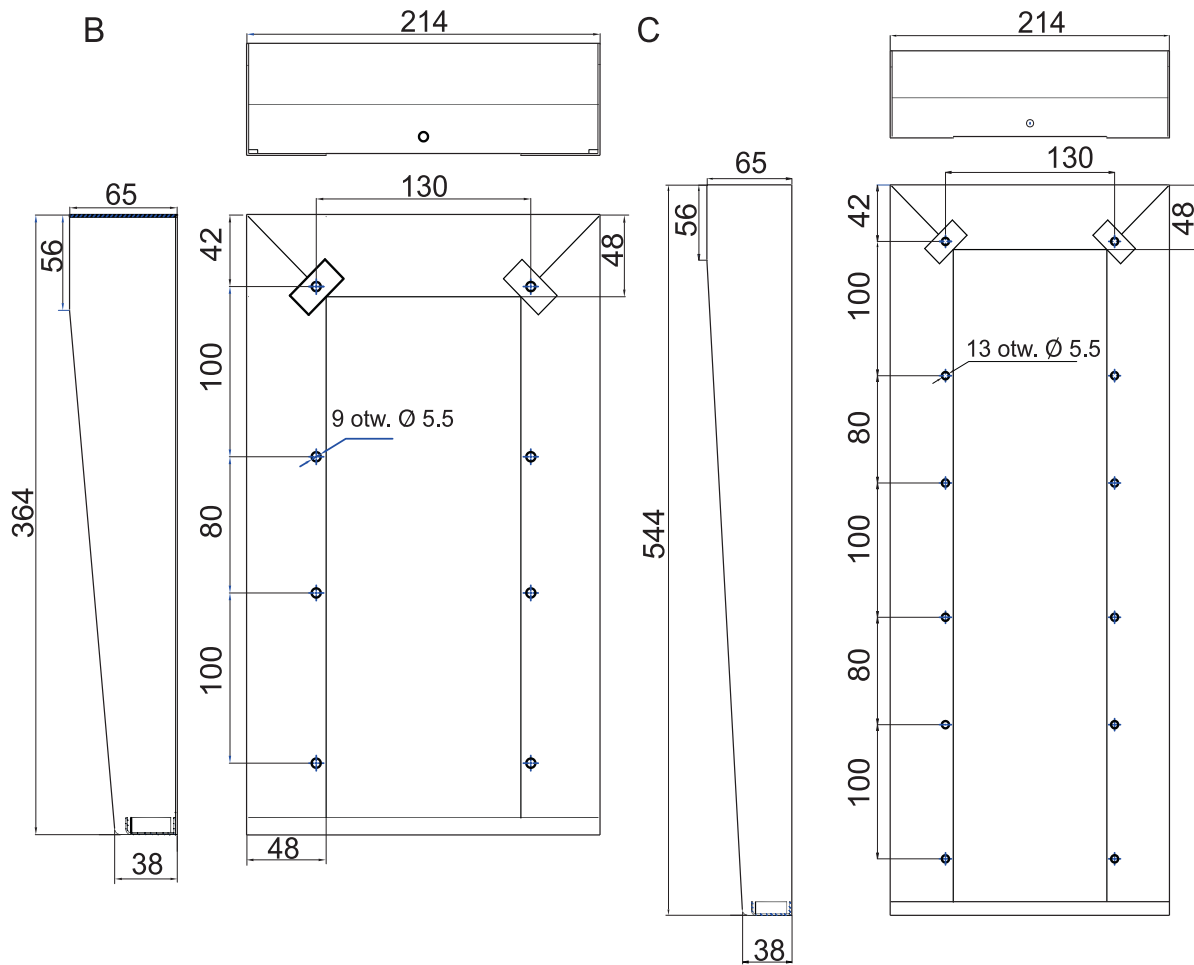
Dimensions of casings mounted on plaster in vertical arrangement, for panels CP-3100xx
